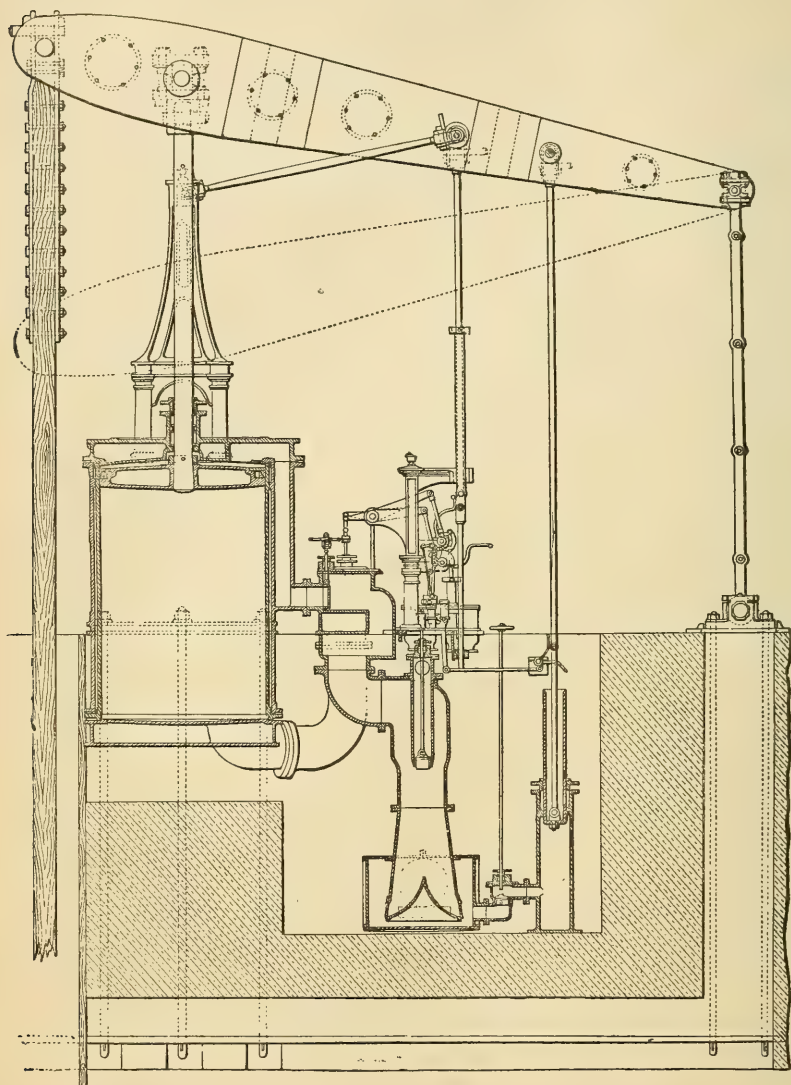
Overhead-beam Pumping Engine. Side Elevation.
